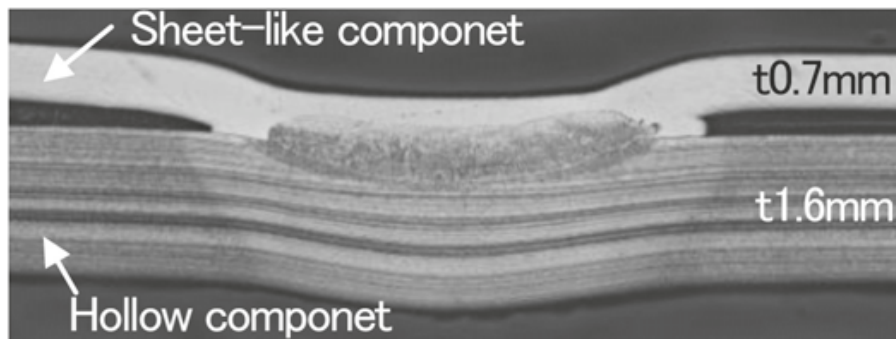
F-1: Cross section of indirect spot weld for hollow and sheet-like components.
